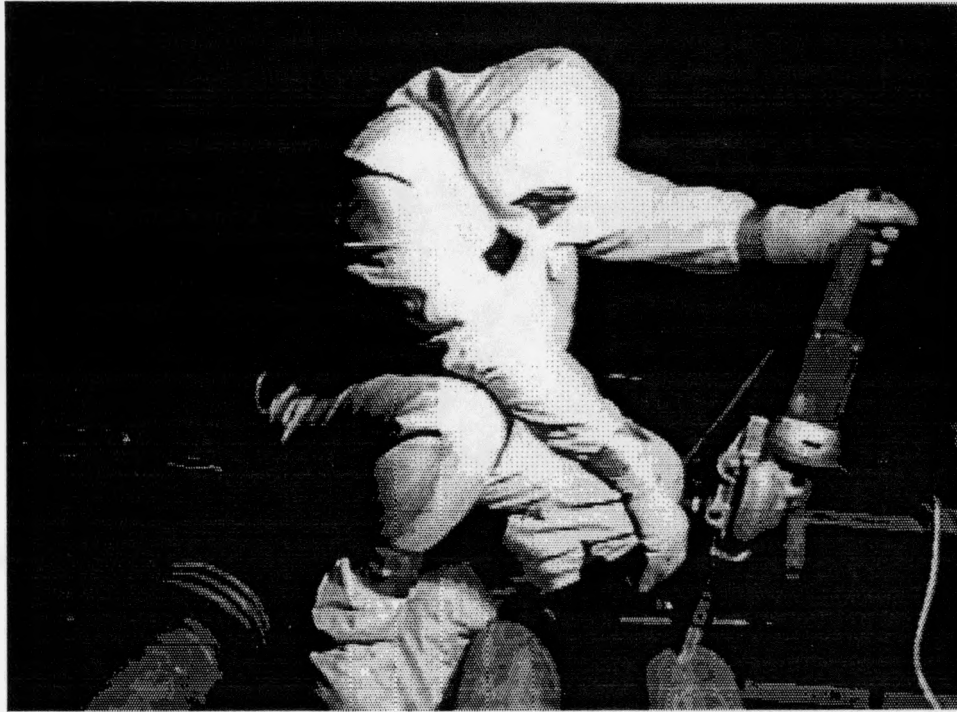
Power hacksaw cutting of a three-inch diameter pipe in the Reactor Enclosure.
